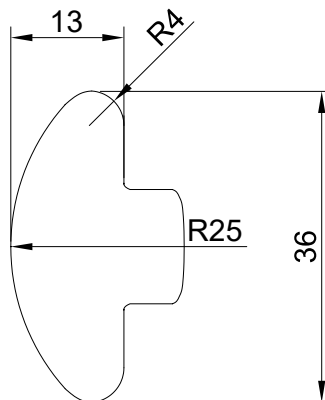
Dimensions of a VDE type spherically capped electrode used in the study. All dimensions are in millimeters.
